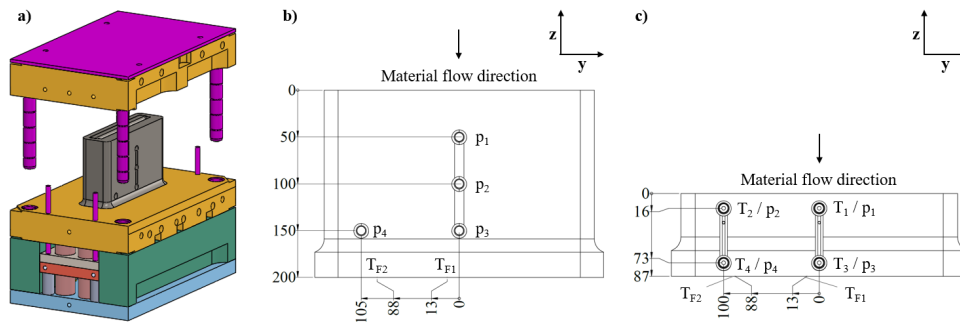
a) Compression molding tool and b) – c) cavities with the respective geometric positions of the sensors.
